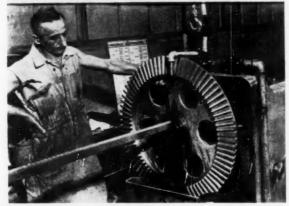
Checking lead of a gear on a Michigan lead checker.
